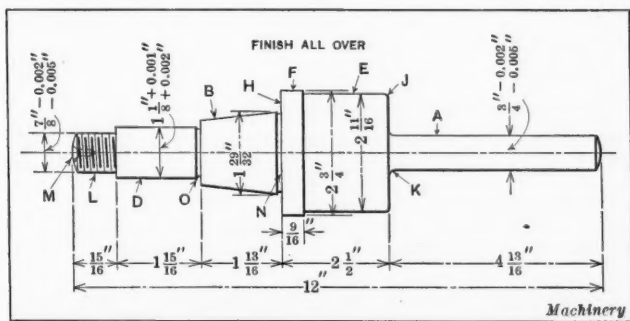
Drawing of Work which is machined by Tooling Equipment shown in Fig. 25
